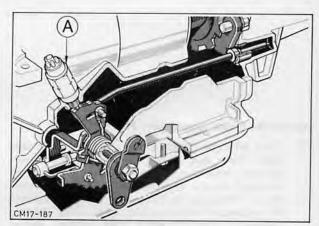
Interlock and parking pawl mechanism A - Starter inhibitor switch
